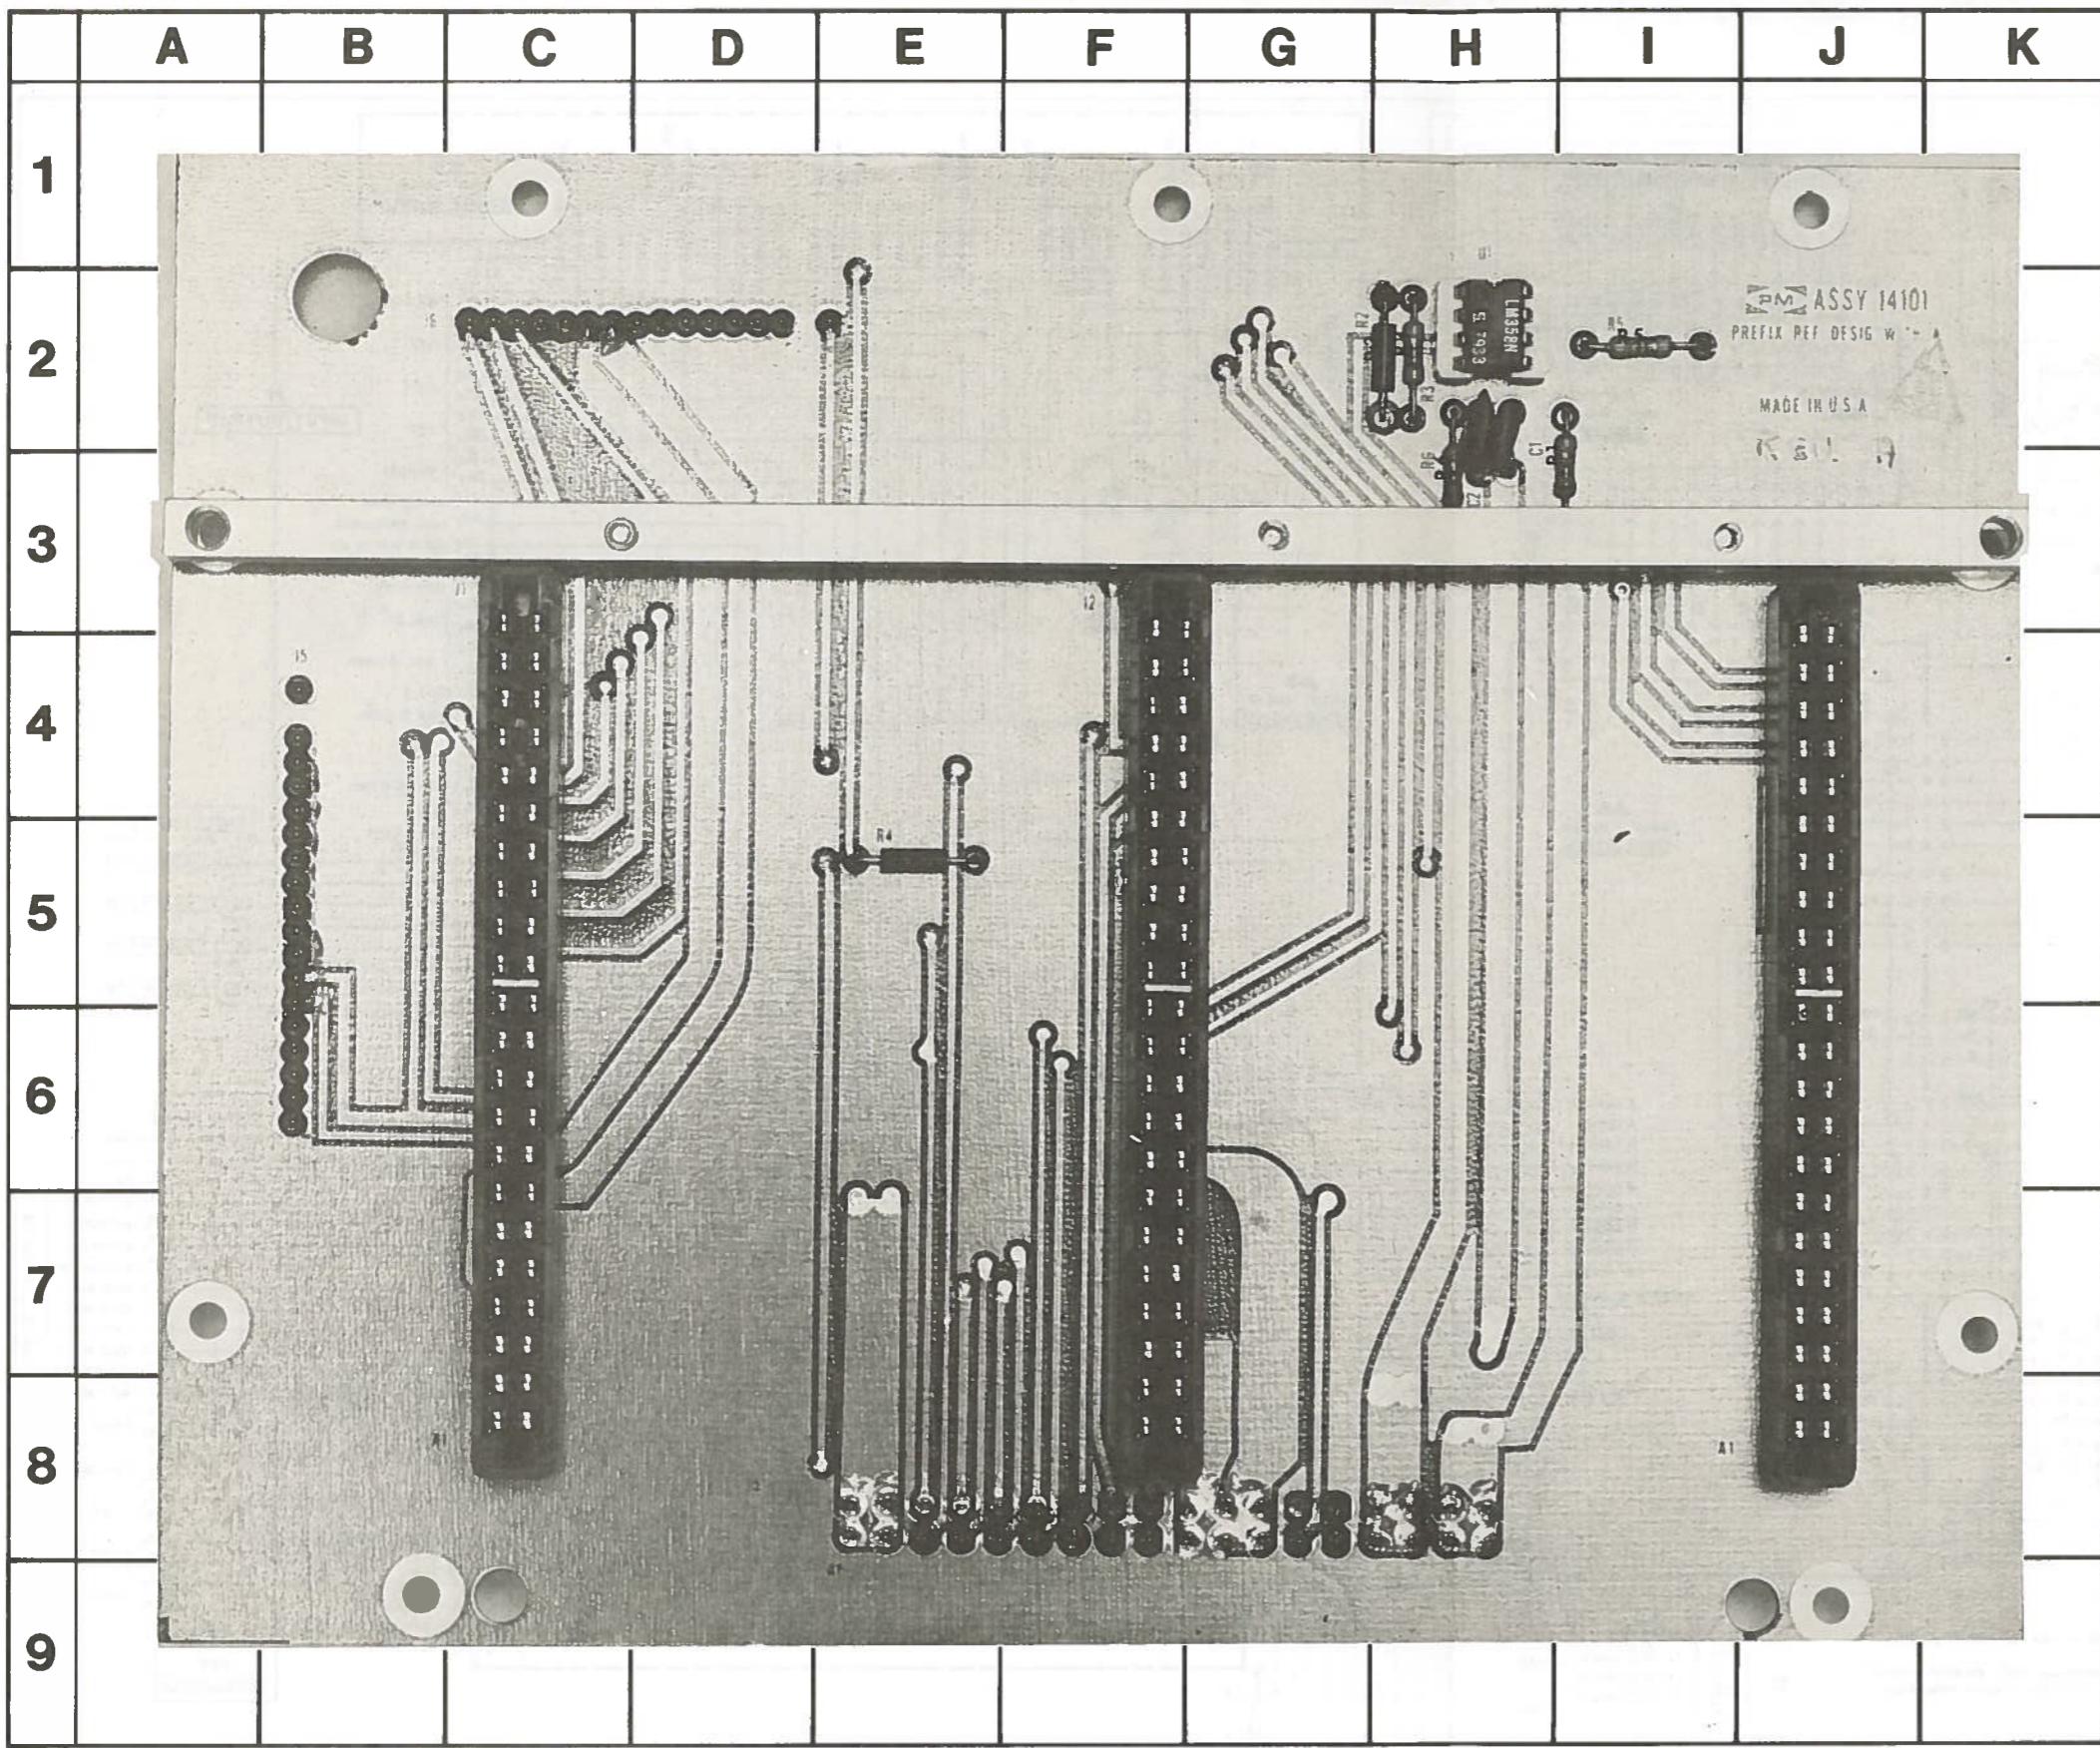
INDICATOR PCB ASSEMBLY
